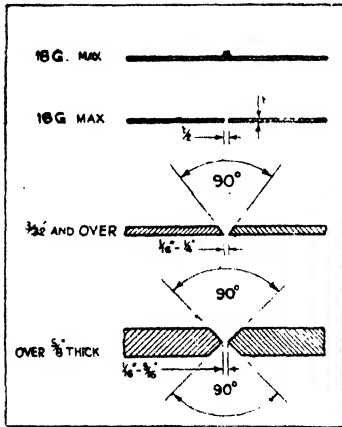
EDGE PREPARATION FOR COPPER—UNDERHAND WELDING
